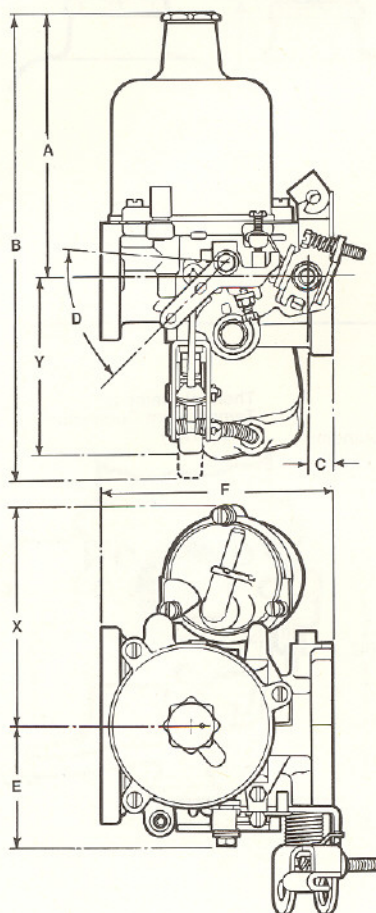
(b). Dimensions HS4C-HS8 carburetors.
